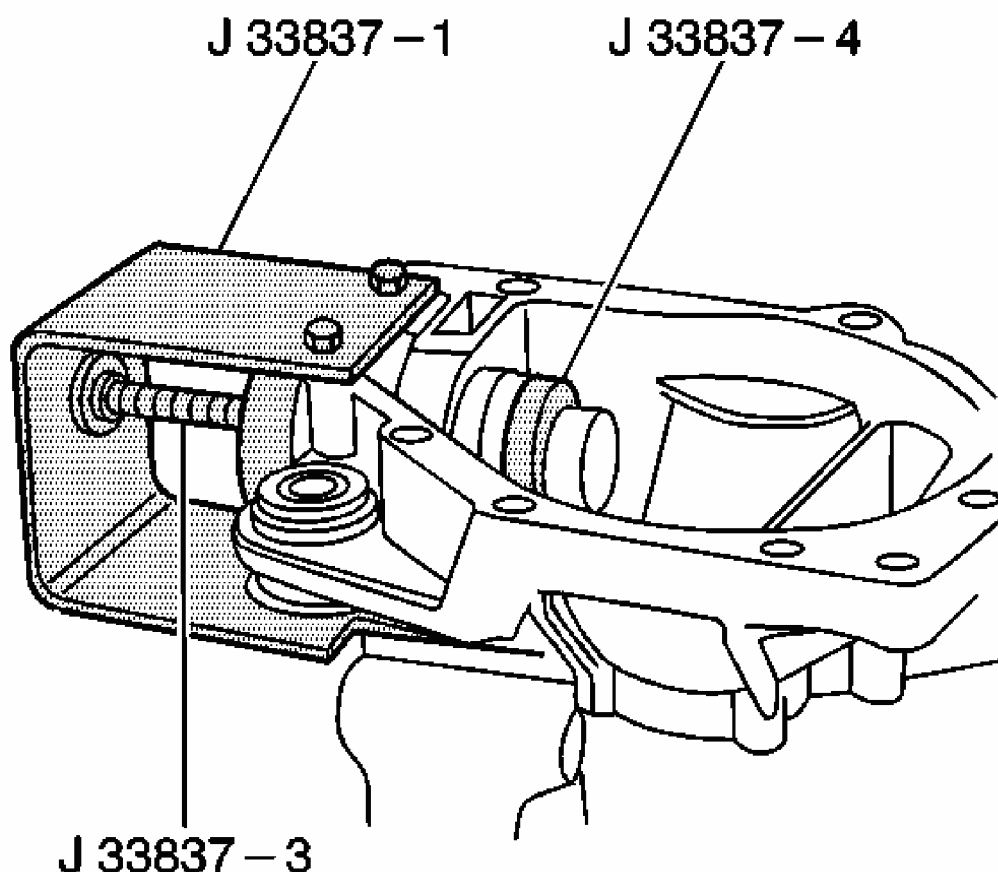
Installing Inner Pinion Bearing Cup Into Differential Carrier Case Opening
